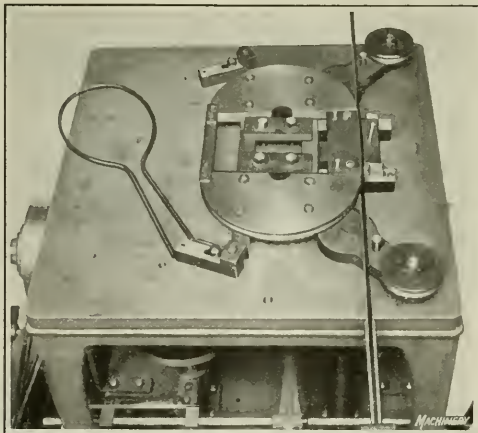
Tool Set-up for the Preliminary Bending Operation
